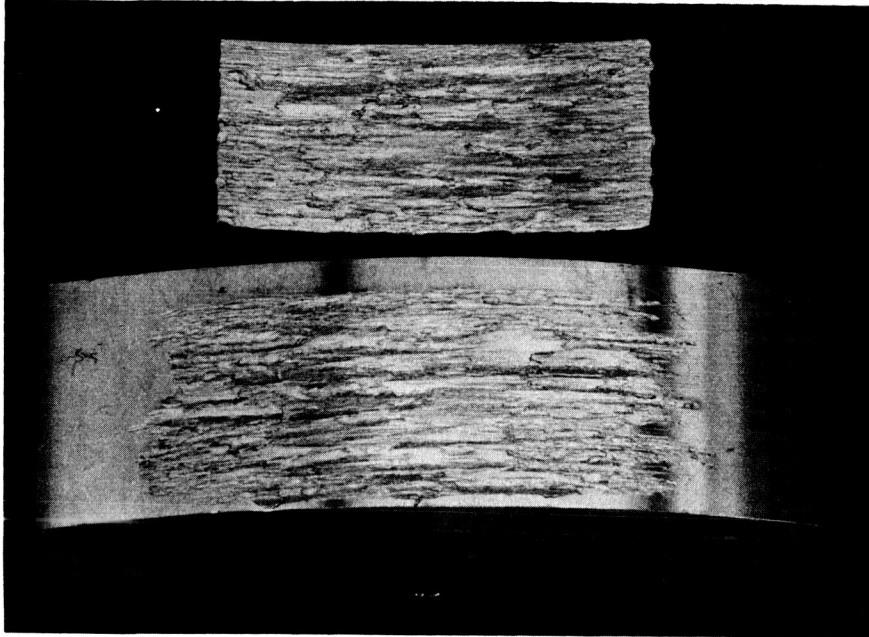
BALL JOINT TEST SPECIMEN TYPE - 6;
